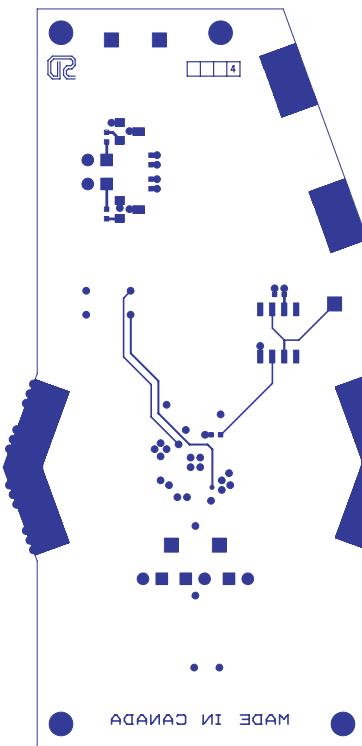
XBN2013A PCB Layout - Bottom Components
